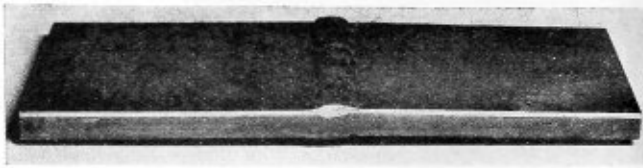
Butt-welded joint, metallic-arc welded
